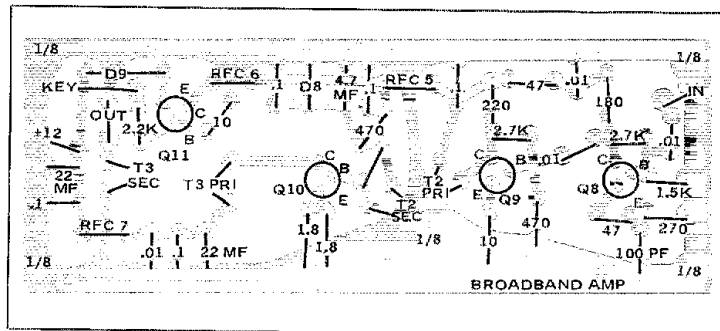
Parts placement guide for the amplifier pc board. The shaded area represents an X-ray view of the etched foil pattern; this view is from the component side of the board. (See Hints and Kinks in this issue for etching patterns.) Double-sided board is used for this module. The foil on the component side is used as a solid groundplane, having only clearance holes for the mounting of the components. The commercially made board shown in the photo also has component identification information etched on this side of the board. All mounting holes on pc board marked with a "1/8" should be drilled through with a 1/8-inch drill bit. The board can then be mounted to the chassis with 6-32 machine screws, spacers and nuts.
